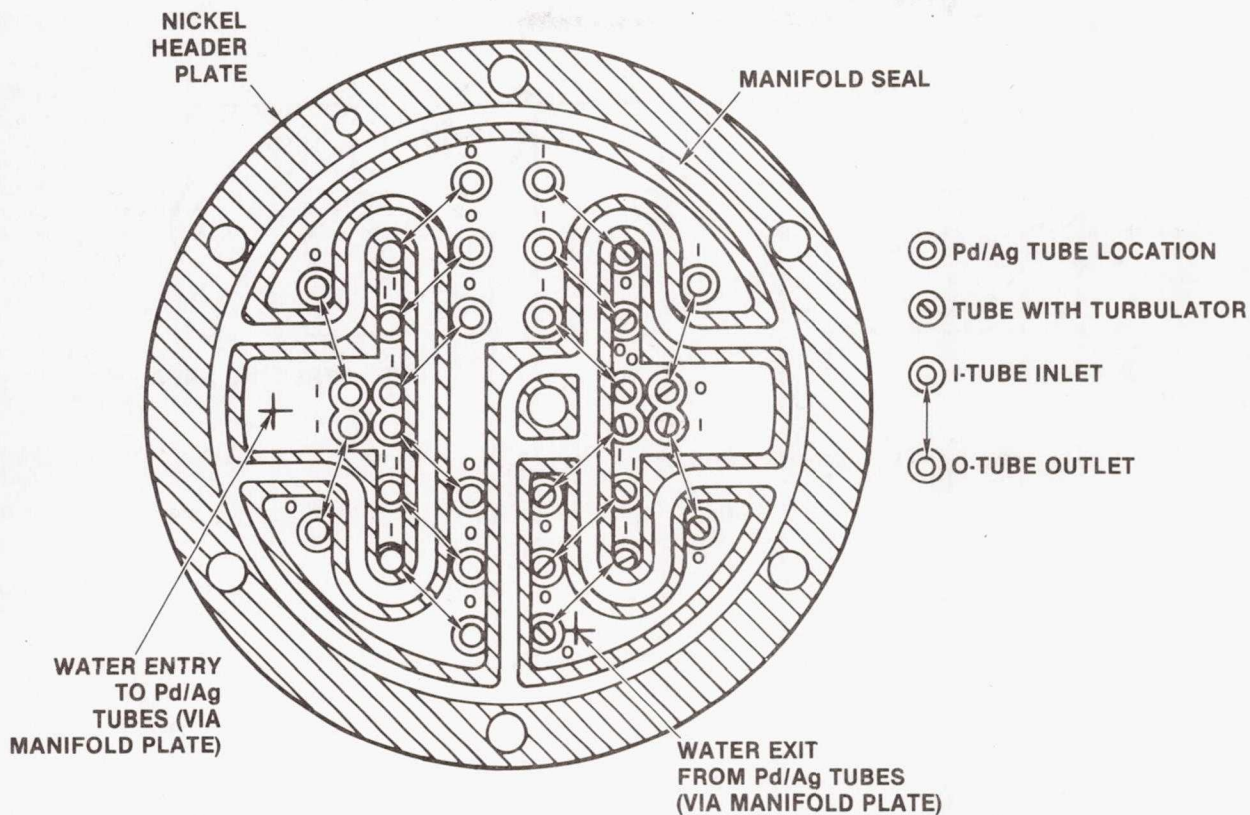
HEAD PLATE SHOWING Pd/Ag TUBE LOCATIONS AND MANIFOLD SEAL CONFIGURATION
